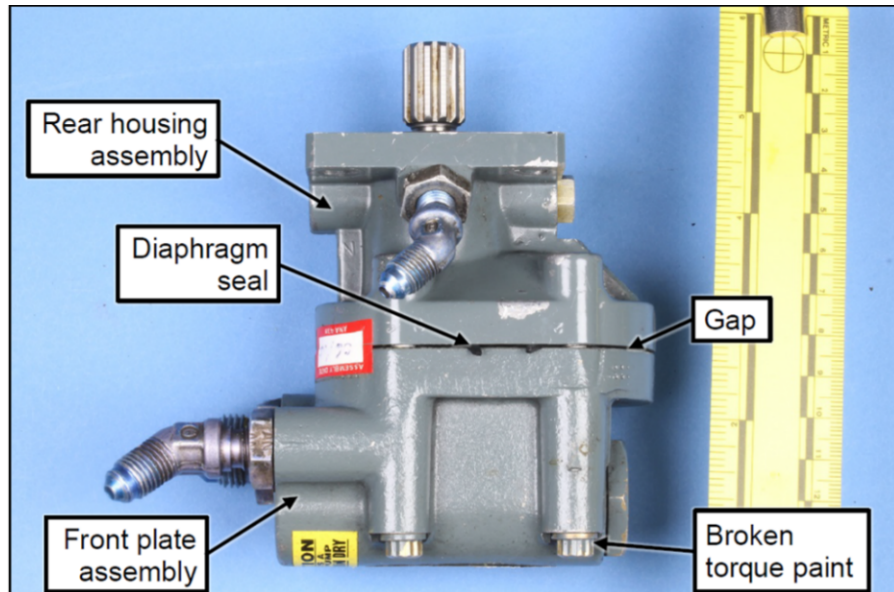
A photograph showing the engine-driven hydraulic pump before disassembly.
